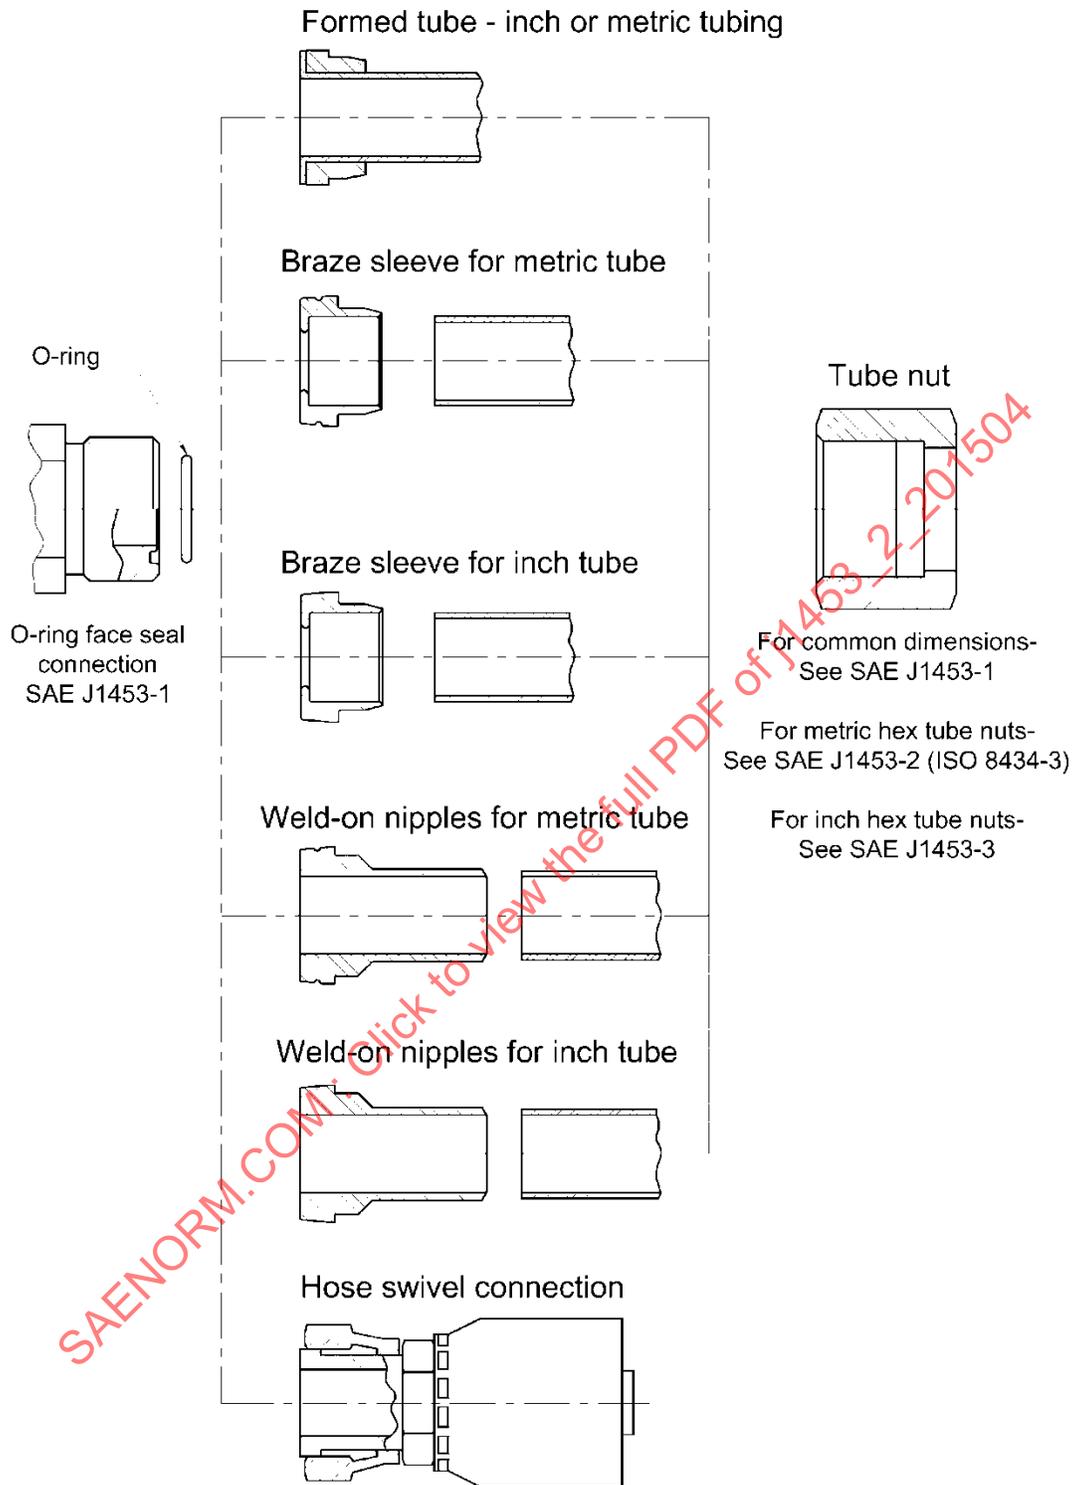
Typical O-Ring face seal connection to inch or metric tubing or hose
